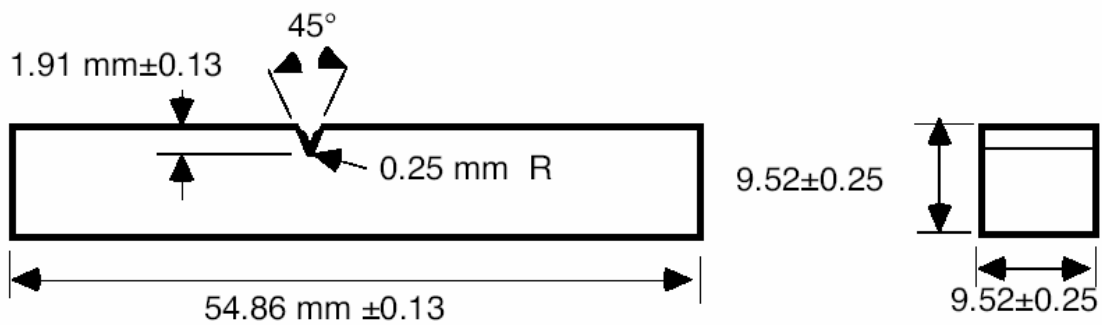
Charpy V-notch specimen used in this laboratory showing dimensions
